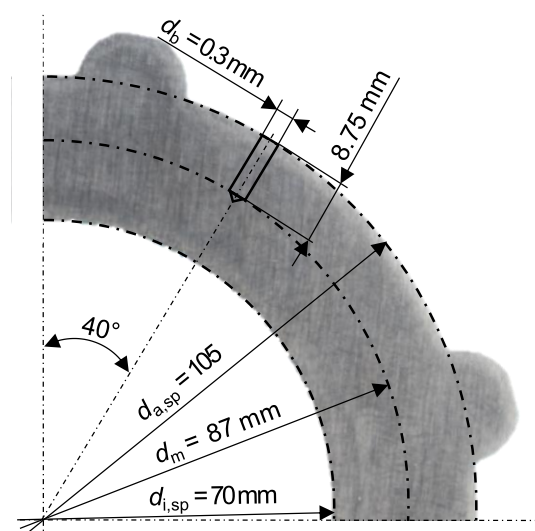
Position of the hole for the thermocouple and dimensions of the steel plate
